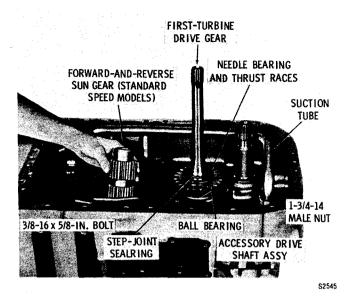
Removing forward-andreverse sun gear (models with standard speed ratio)
